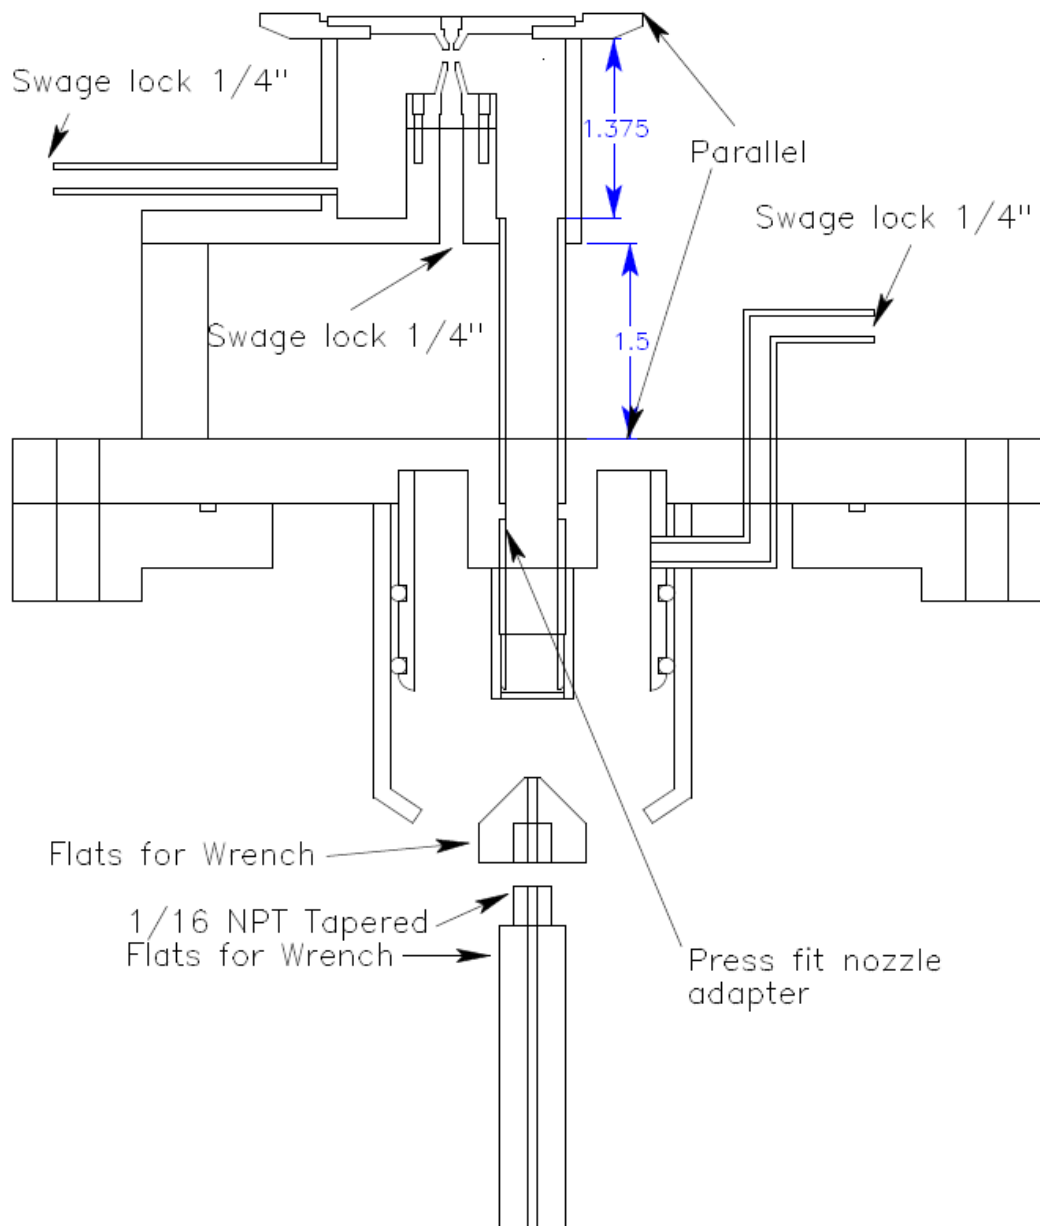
The top flange of the fluid collection chamber and virtual impactor.
